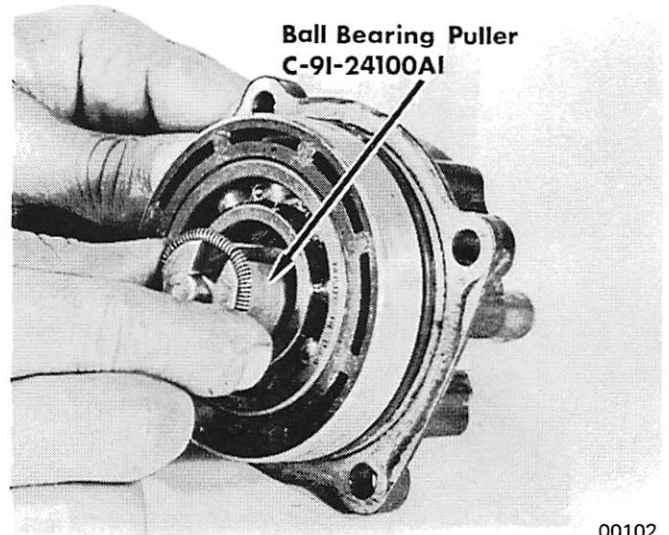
Inserting Ball Bearing Puller into End Cap Ball Bearing
